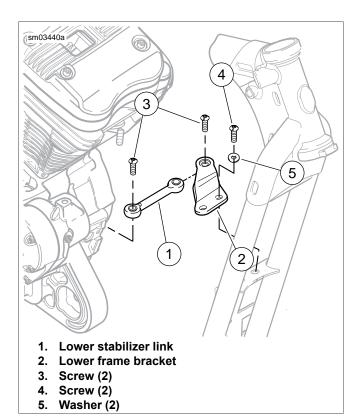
Lower Front Stabilizer Link Assembly (typical)
